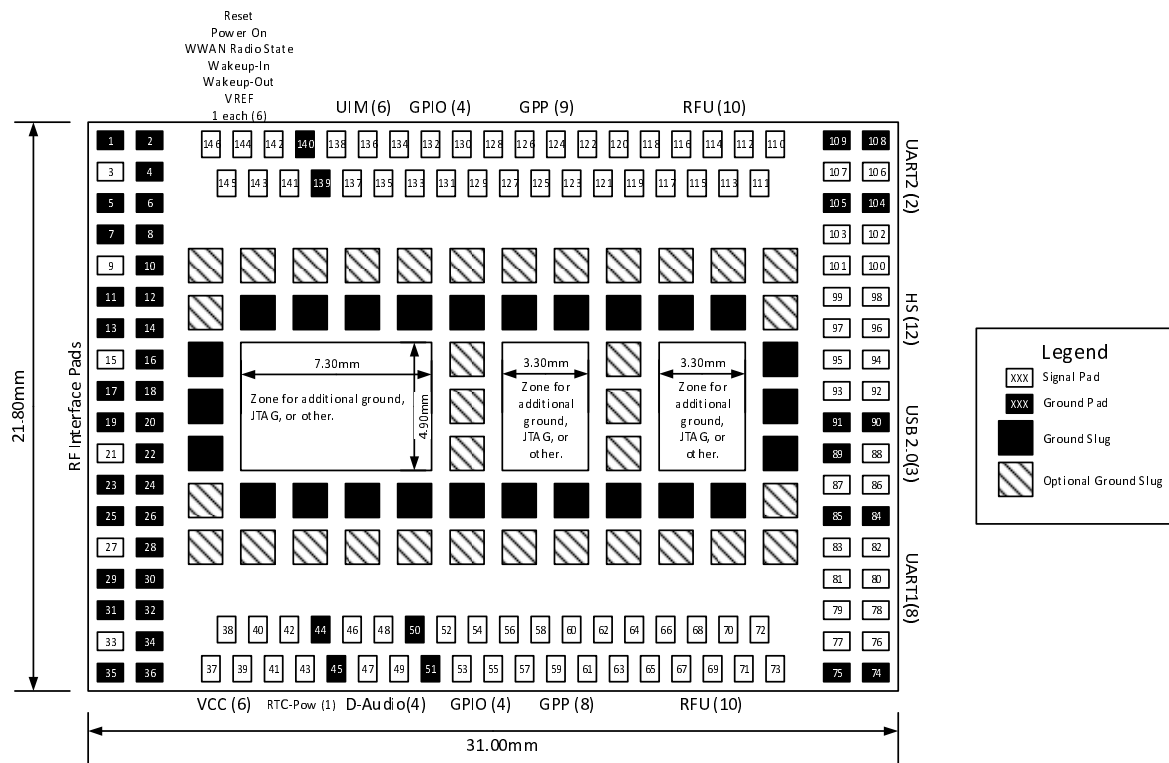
SMT3122 black and white physical form factor (676 mm<sup>2</sup>), dimensions, pad numbering and placement
